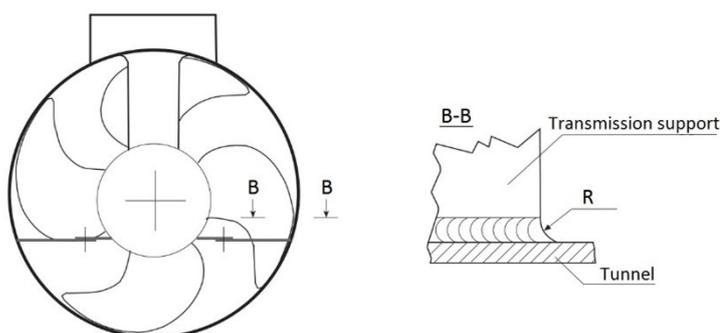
Connection between gear housing support bracket and thruster tunnel
